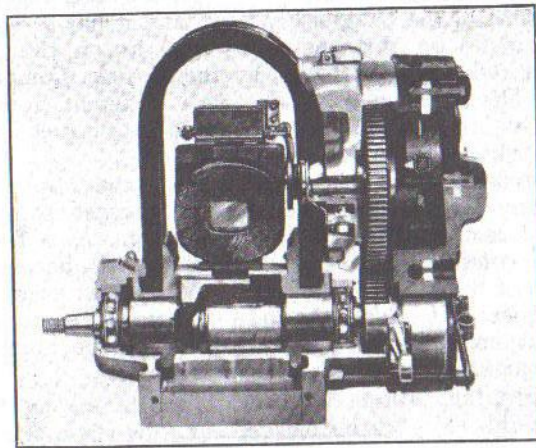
Sectional View of a B.T.-H. Inductor Magneto.
